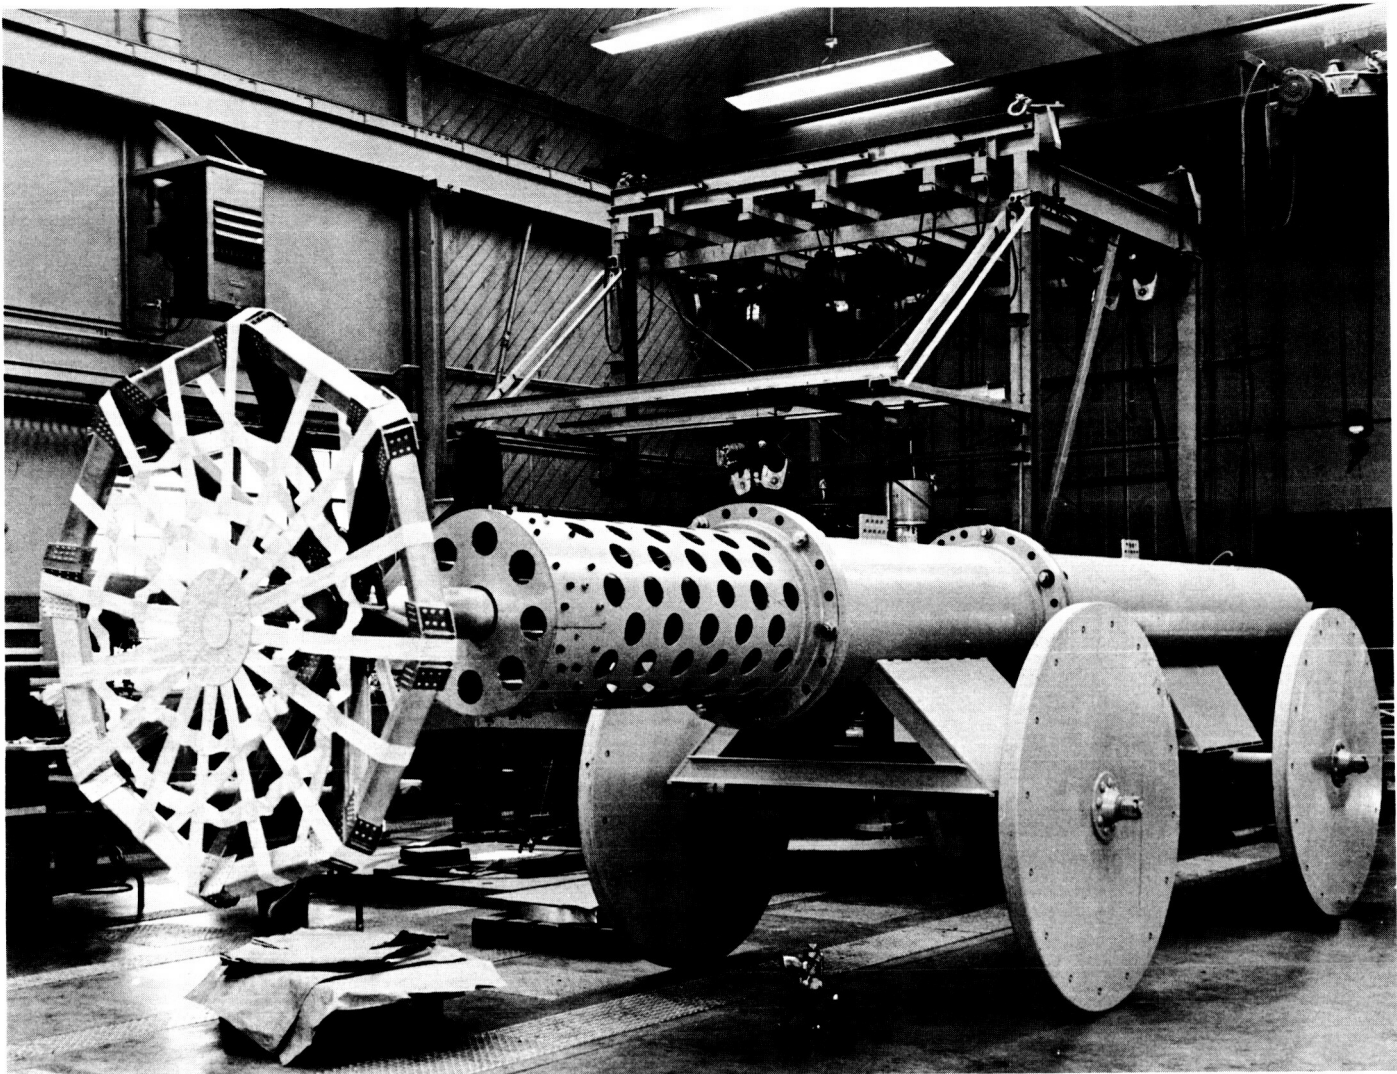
Compressed-air gun, 22-in. diameter, with piston
